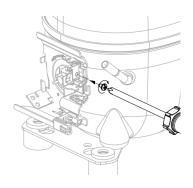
Step 3 - Screw the grounding terminal in cord anchorage bracket
